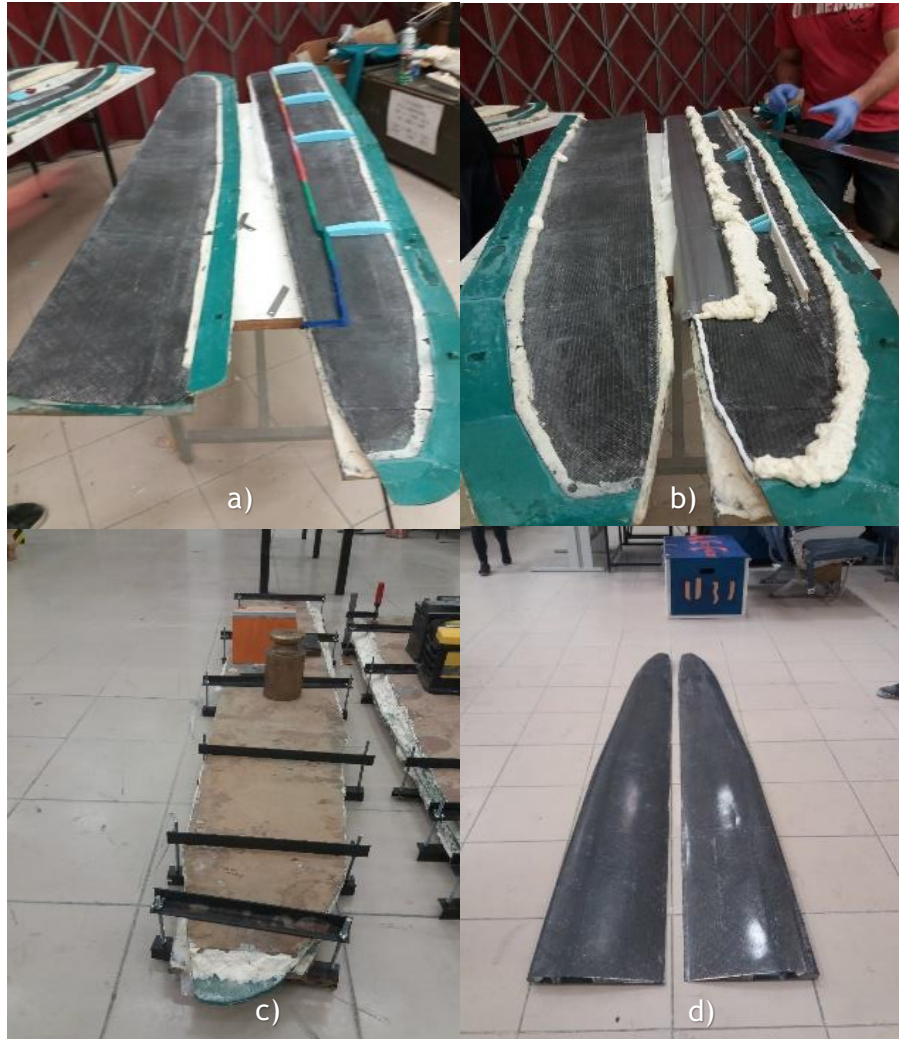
Wing manufacturing, joining the upper and lower surfaces
